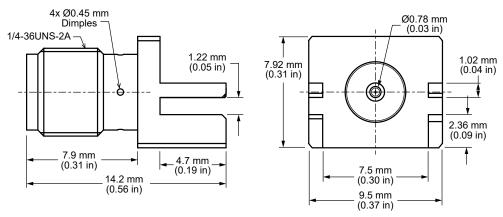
Product Dimensions for the CONSMA020.042-G Connector Table
